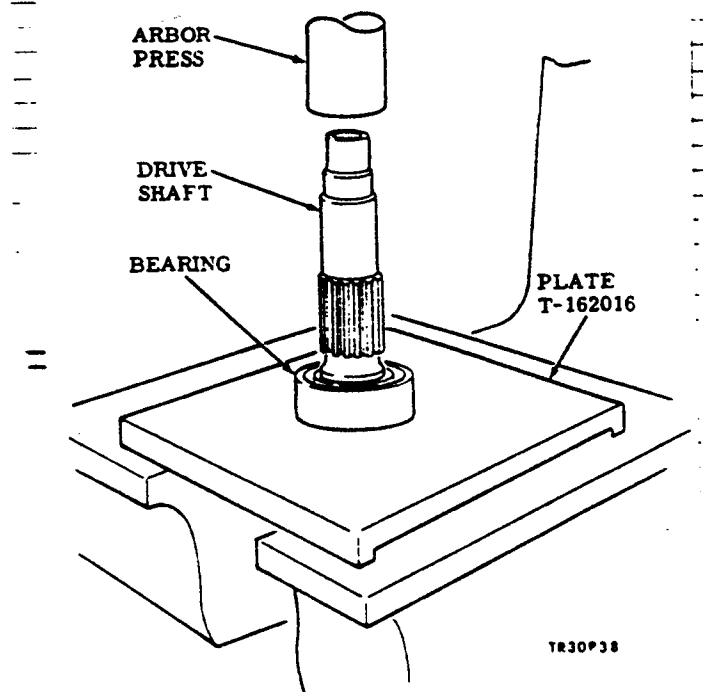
Assembly of Drive Shaft Bearing to Drive Shaft
